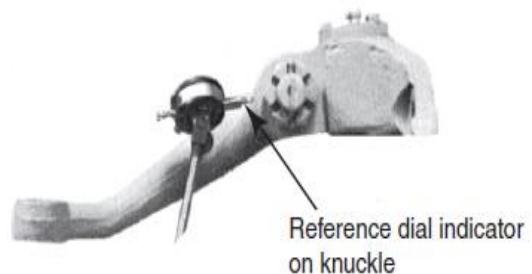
2 Inspecting Free Play In The Upper Bushing
